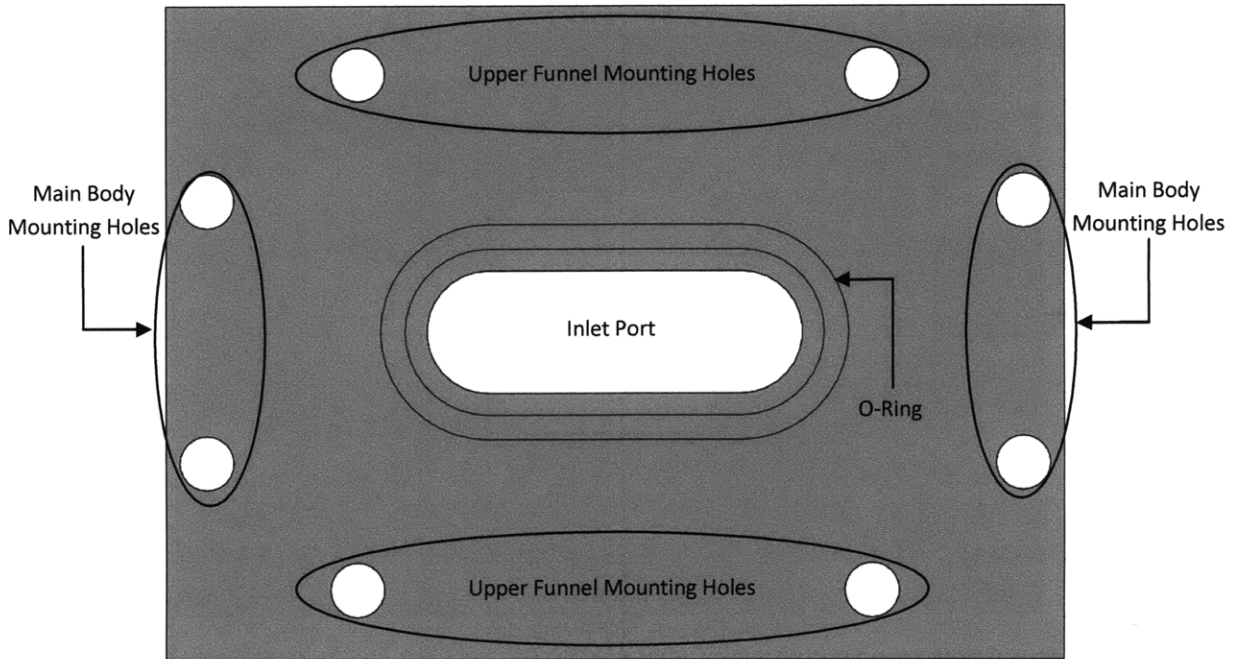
Upper Funnel Anchor Plate with O-Ring - Bottom View
